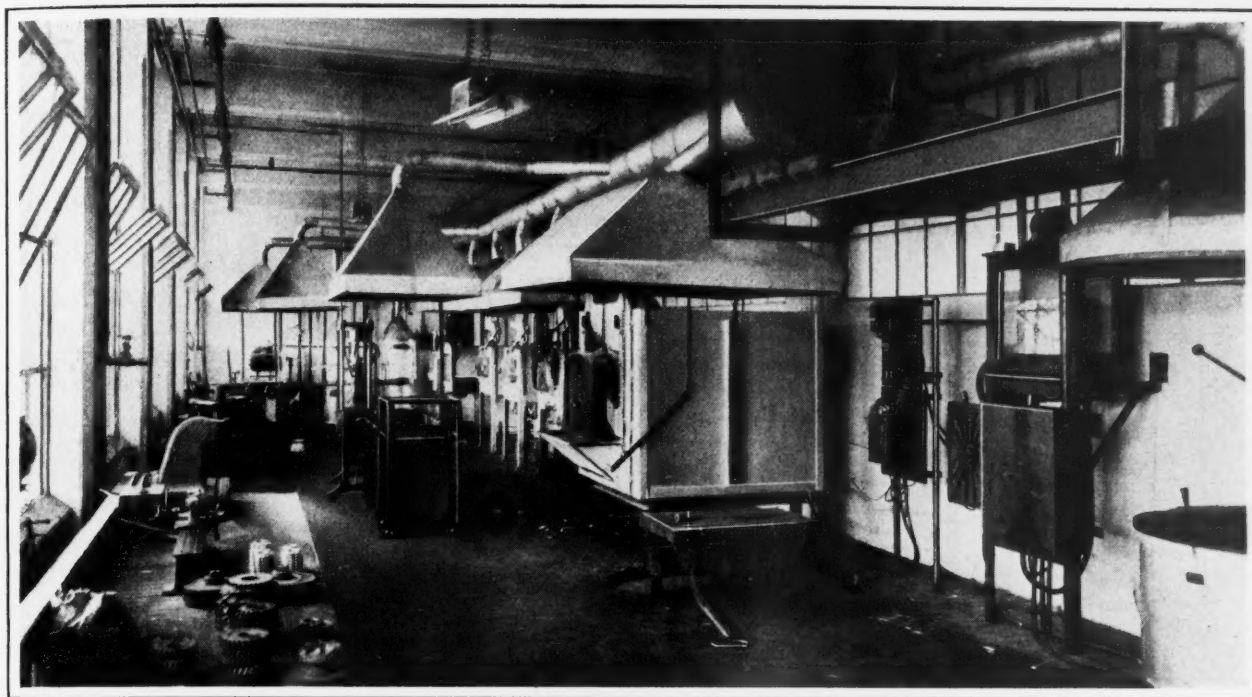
High-speed Steel Heat-treating Room in which the Main Equipment Consists of Five Surface Combustion Gas Furnaces
